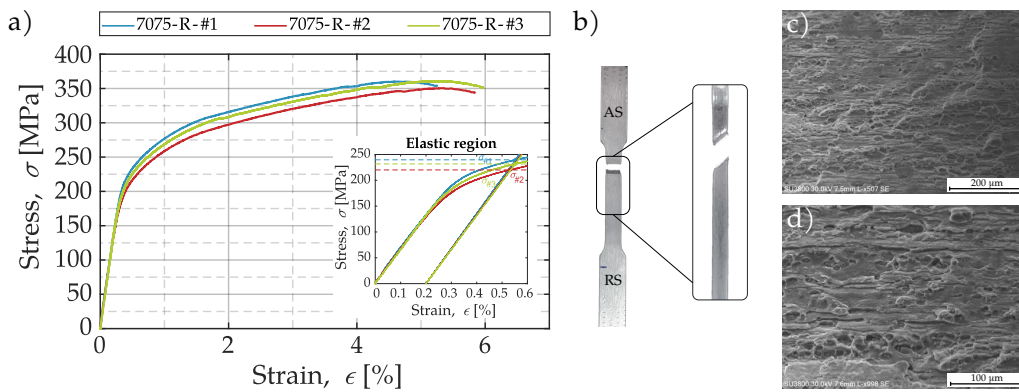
Uniaxial tensile tests of AA7075-R: engineering stress-strain curves (a); fractured AA7075-R-#1 sample (b); fractured surface (c, d)
